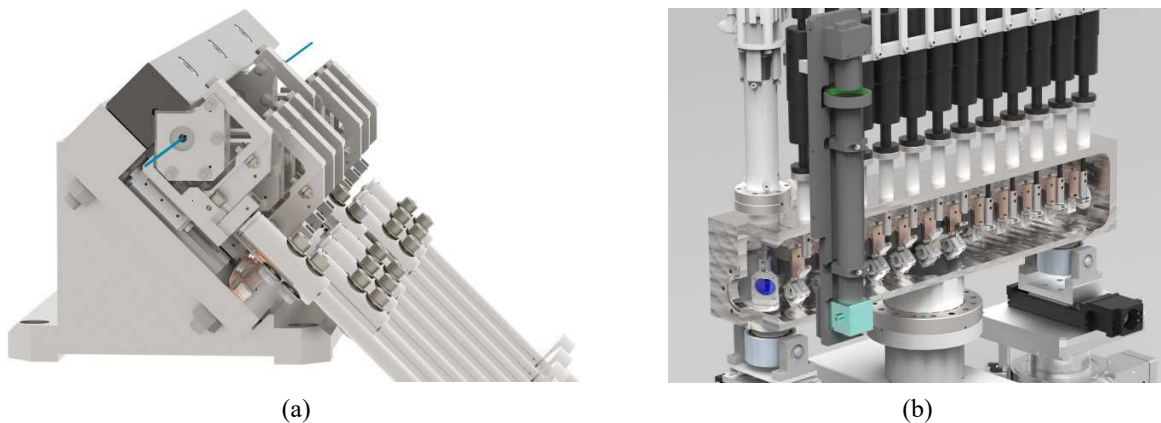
Rendered images of support stage and vessel of the transfocator. a) Motorized translation stages (red) for alignment, linear slide and bearing for compensation movements (blue). b) Vacuum vessel with service hatch with the 8 DN16 CF flanges under an angle of  $45^\circ$  for the pneumatic feedthroughs. Two DN40 flanges are used for the diamond screen and camera.
